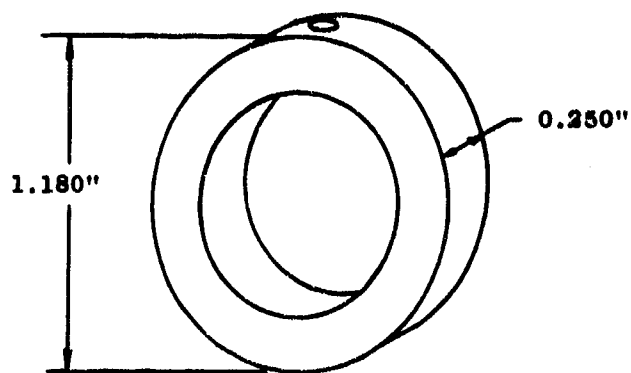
FIXED-POSITION TEST SPECIMEN(7)
